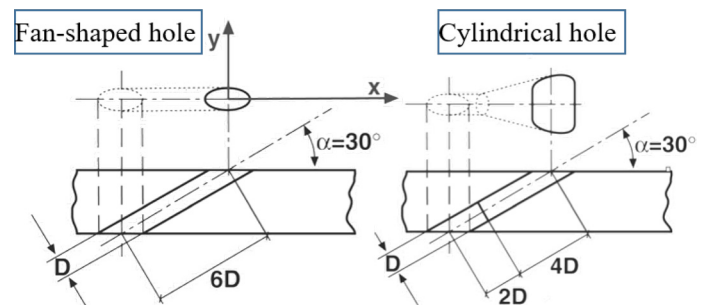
The geometry of film cooling holes: left (a) fan-shaped hole, right (b) cylindrical hole after [12].
